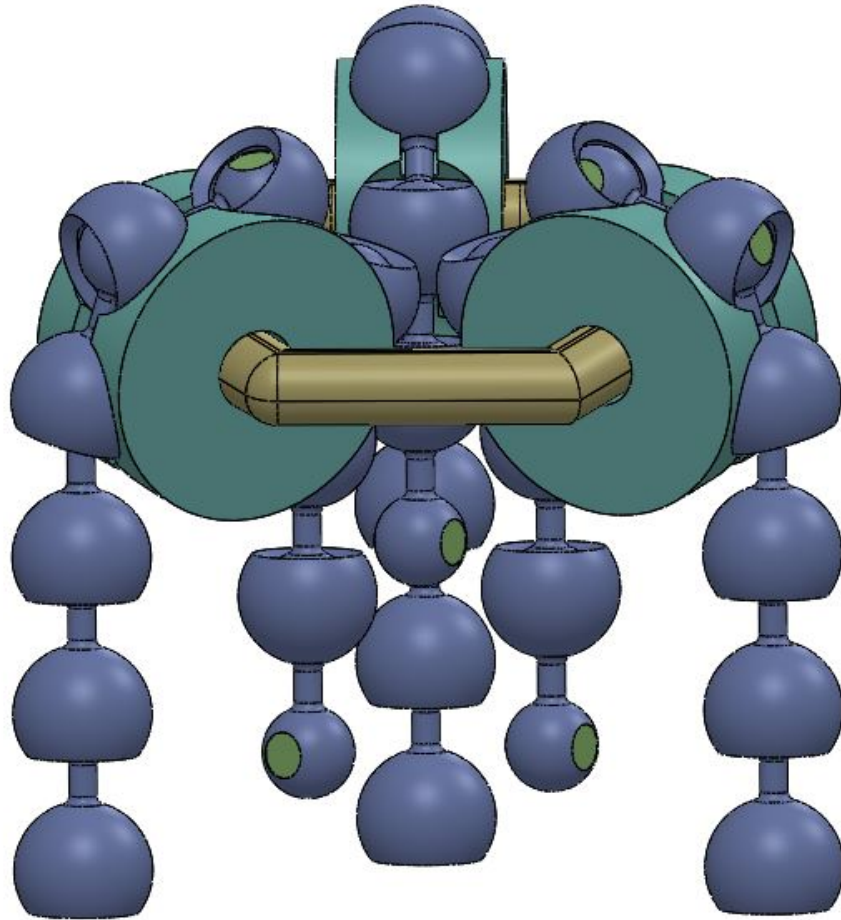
Rough everting chains design able to make 3D movements, with deformable sheets (green), ball socket joints (purple), tip gears (blue) and tip structure (yellow).
